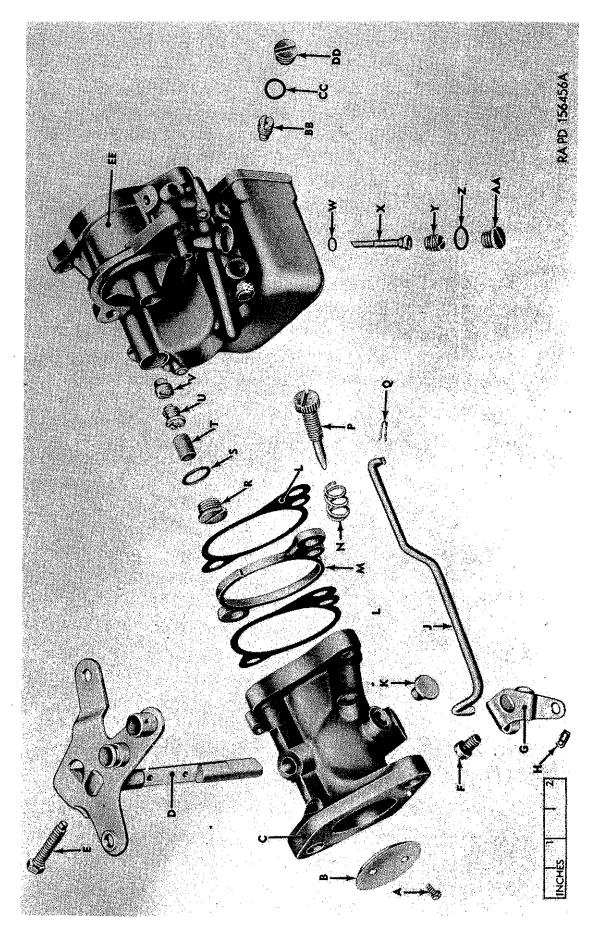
Type W-O carburetor, model 6988—exploded view—Continued
